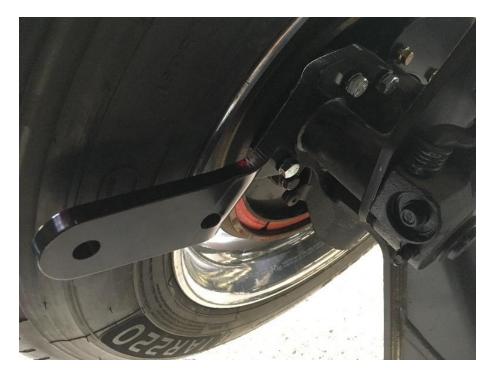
View of Right Front Fender Bracket PB62R Installed
